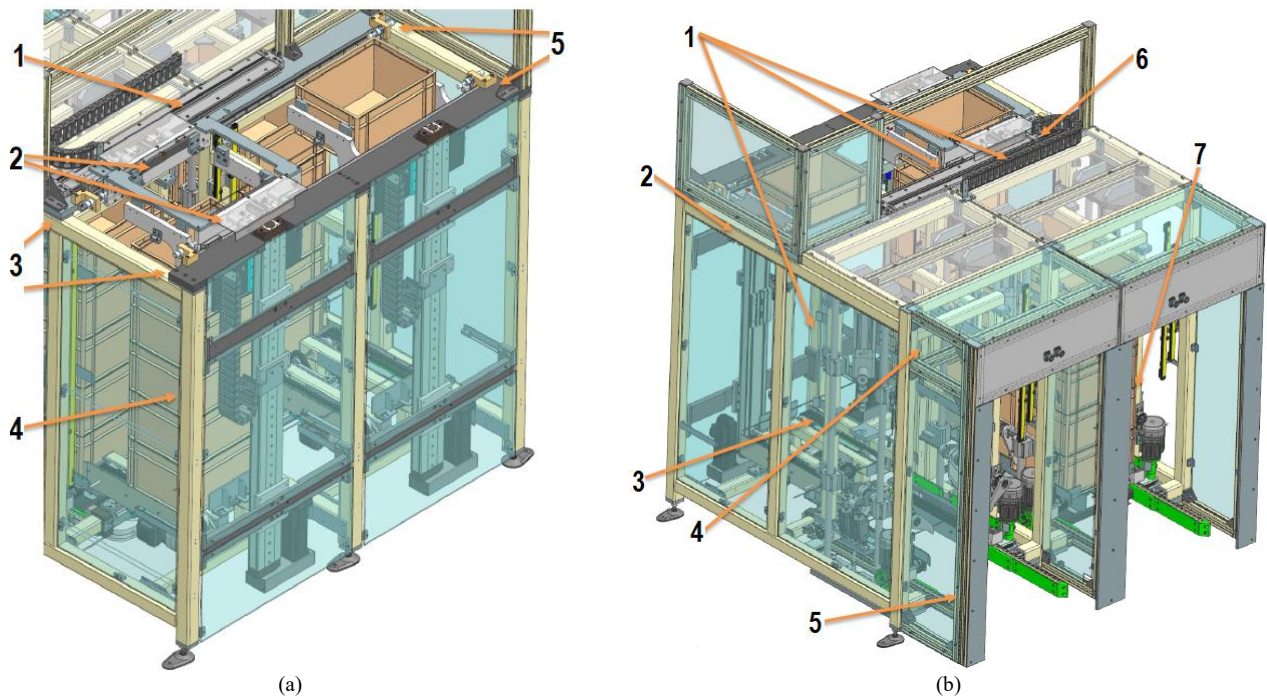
Handling unit for transfer (a) 1 – pneumatic rodless cylinder, 2 – gripping arms, 3 – end stops, 4 – frame, 5 – end stop with damping; and crate feeder assembly (b) 1 – handling units, 2 – frame, 3 – chain conveyor, 4 – unloading mechanism, 5 – front frame, 6 – removal mechanism, 7 – loading mechanism.
